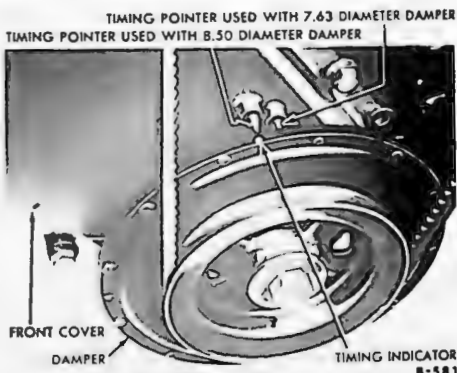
Timing Mark, 6-Cylinder Engine with Die-Cast Front End Plate
